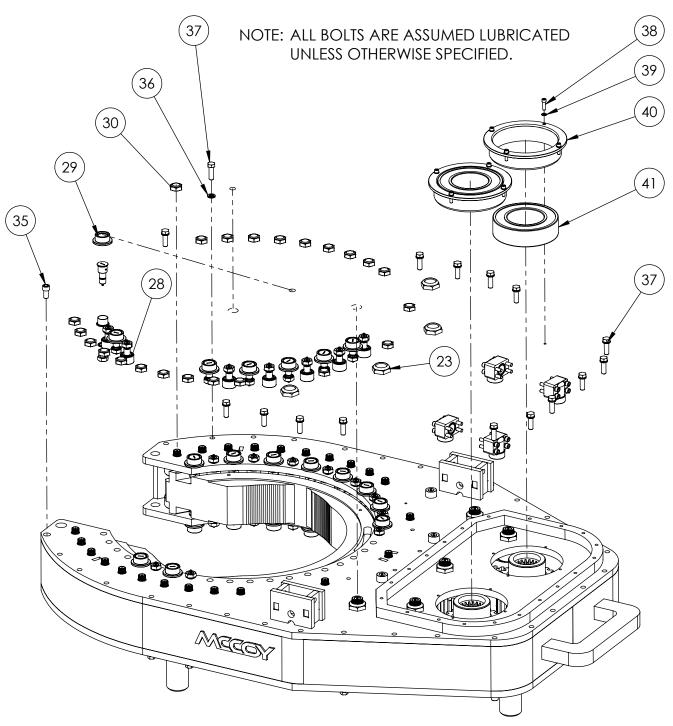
CLE22000XHT-14 External Tong Assembly 03
